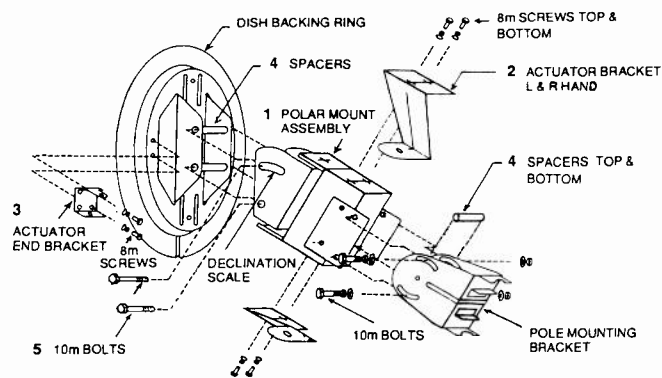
Exploded view of the Lenson Heath polar mount assembly. An additional bracket is required with the 80cm dish.
